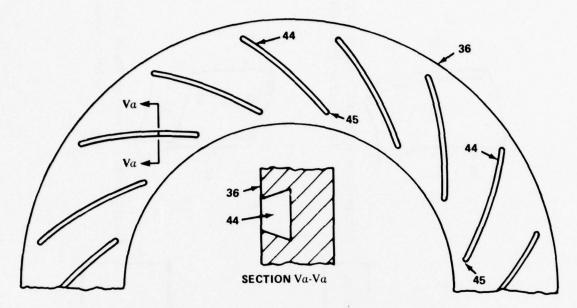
Combination Cam/Ring Gear as Viewed from Upstream
